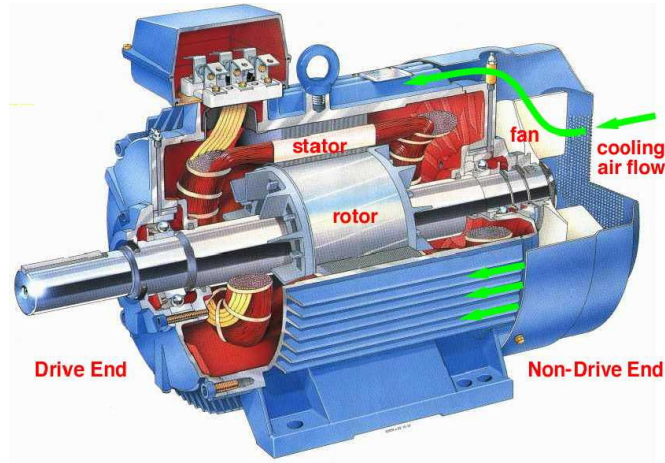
Structure of a 4 kW induction motor showing stator core and windings, stator frame, rotor, and bearings. [Source: GE Power Systems, USA]
